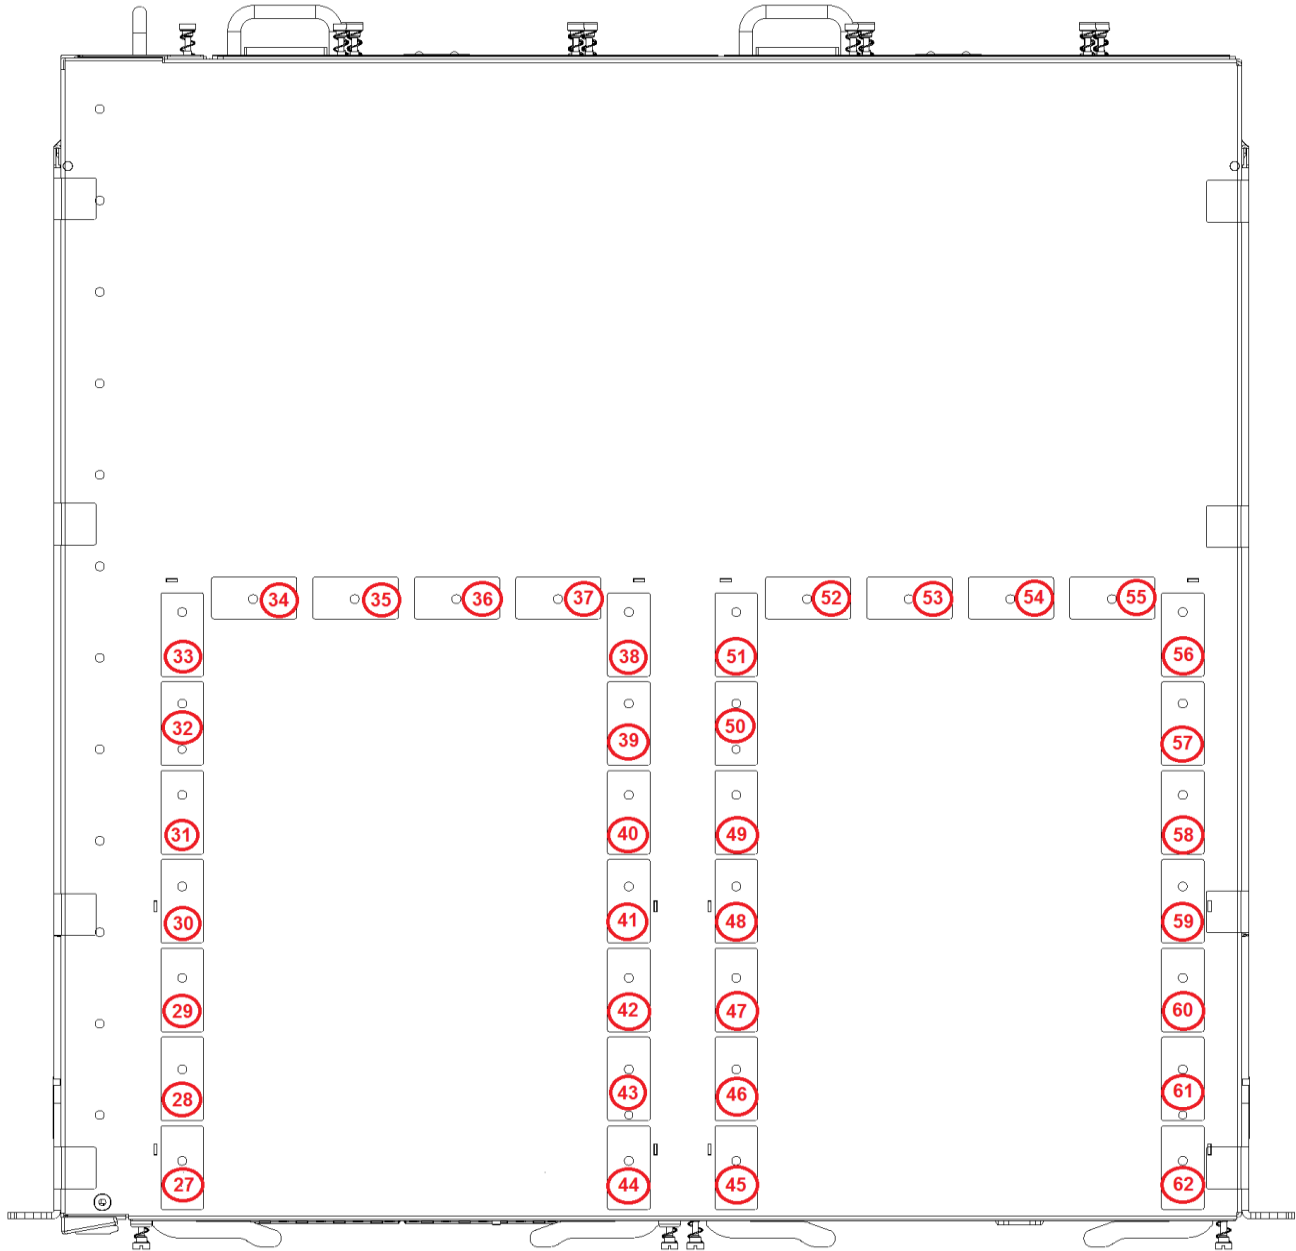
Tamper Evident Seal Placement on Side of HP 8212 zl Switch Chassis
